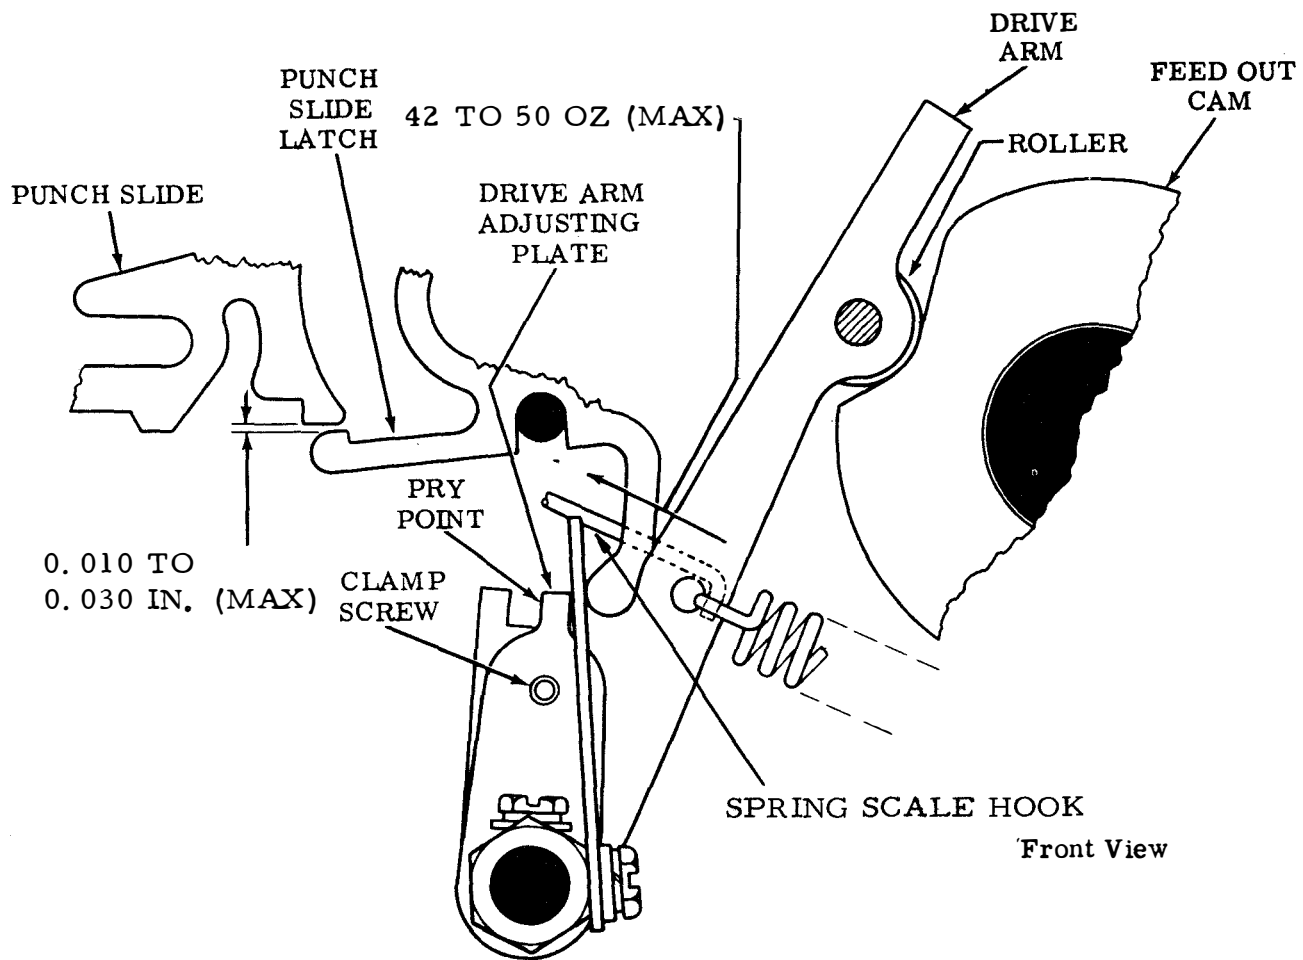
Drive Arm Spring and Punch Slide Latch
